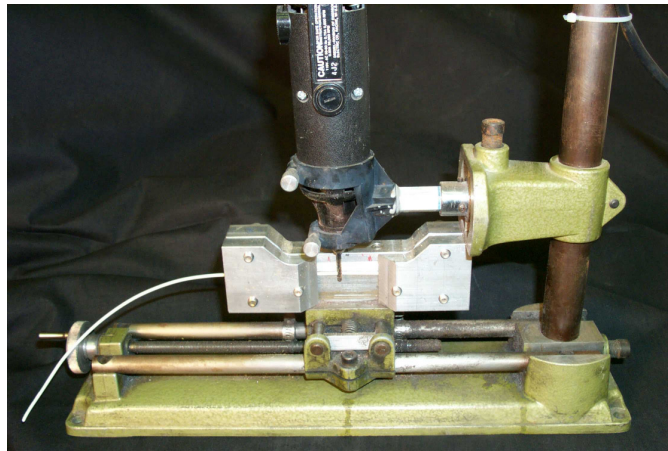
1, Dremel Tool Mounted in Custom Mill.
